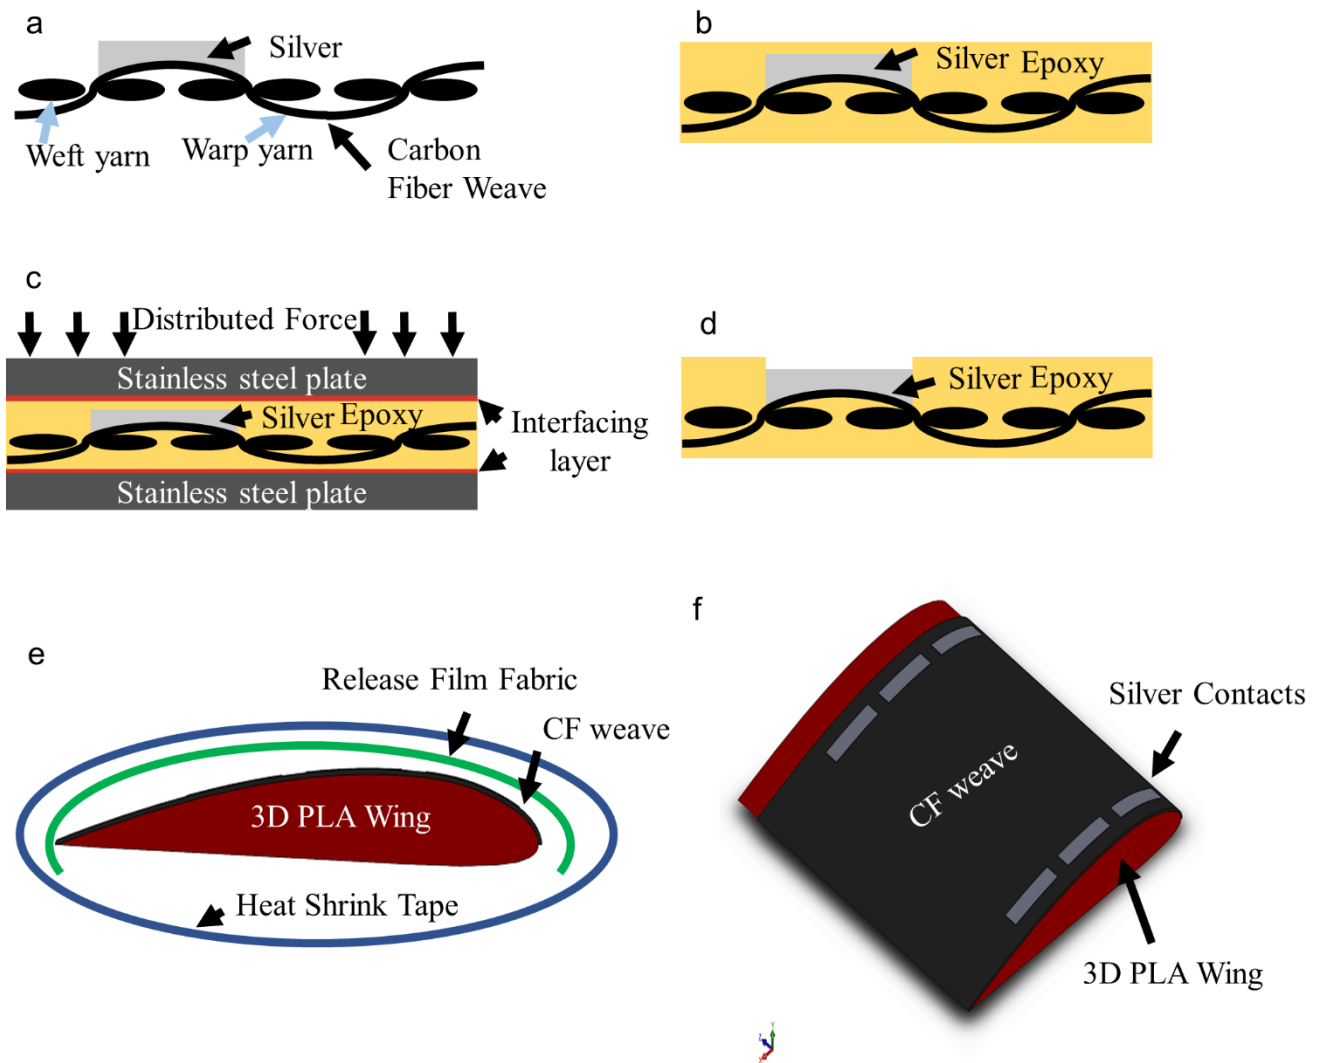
Heater Manufacturing Steps. a) Print pattern on dry carbon fiber weave (cross section); b) Infuse weave with epoxy. For flat device: c) Apply force and cure device in room temperature; d) Peel off, then melt epoxy covering silver pads. For 3D device: e) Wrap carbon fiber weave around mold and apply force using heat-shrink tape; f) Remove tape and then melt epoxy covering silver pads.
